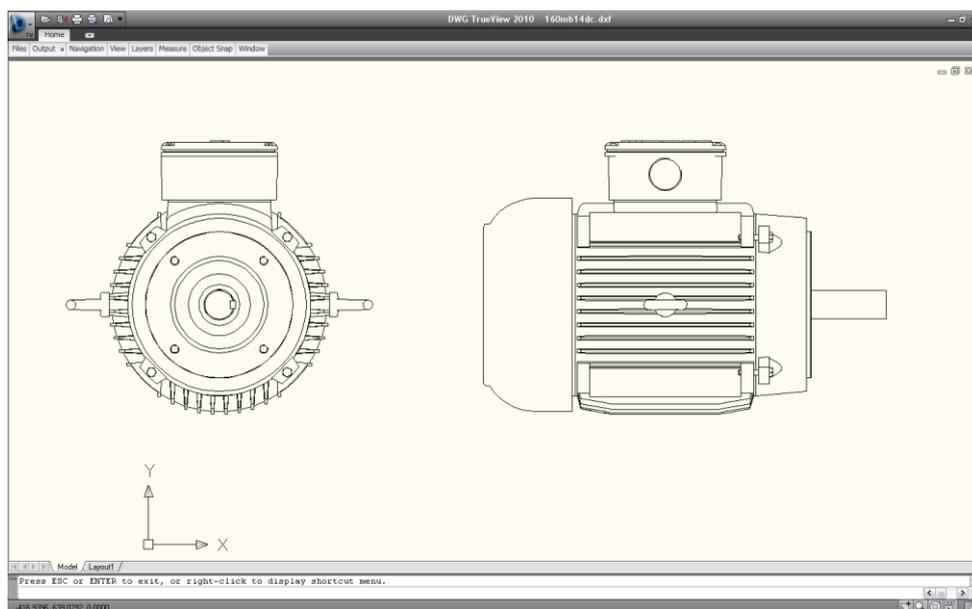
Drawing of the motor frame provided by the manufacturer.
